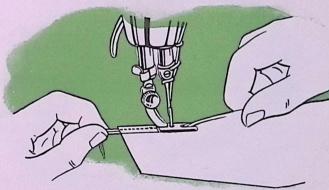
Hemming Edge of Material and Pulling Back Threads While Sewing
